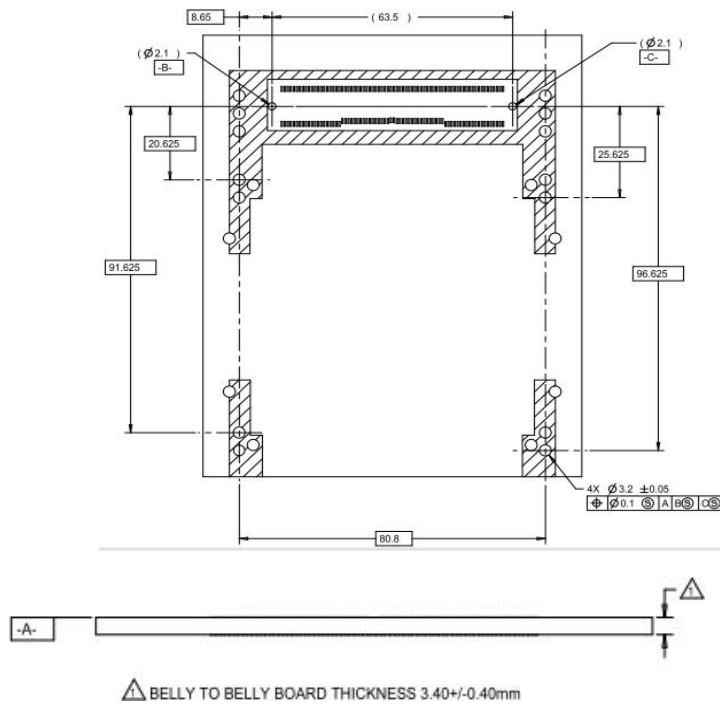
Mechanical Dimensions of Electrical Connectors on CFP Host PCB
